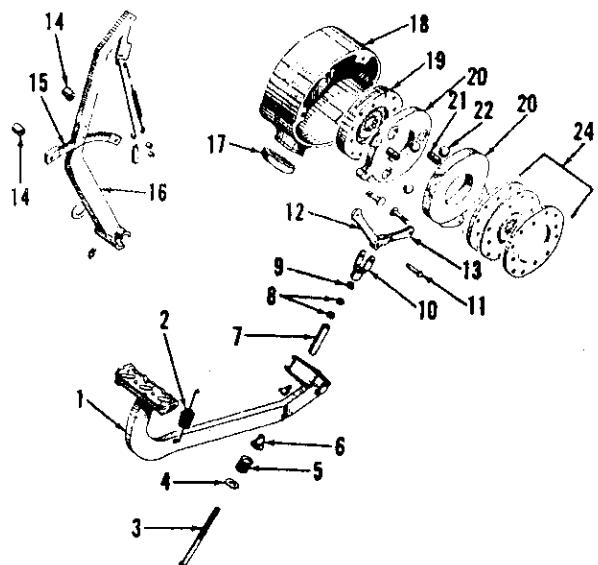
Exploded view showing component parts of Series B-275 right hand disc brake assembly. Early Series B-414 are similar.
